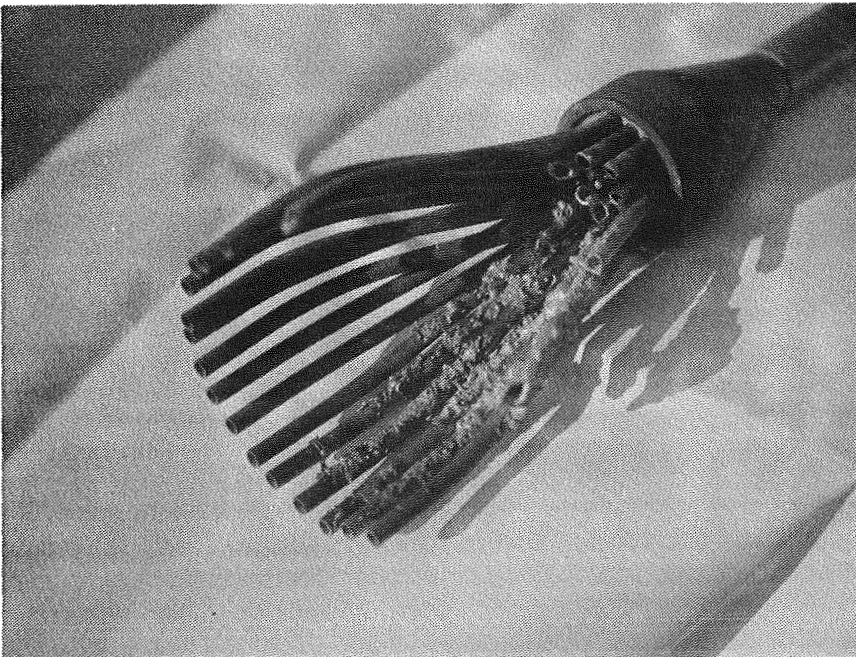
Tube-Bundle Diffuser Injector After Test 3
